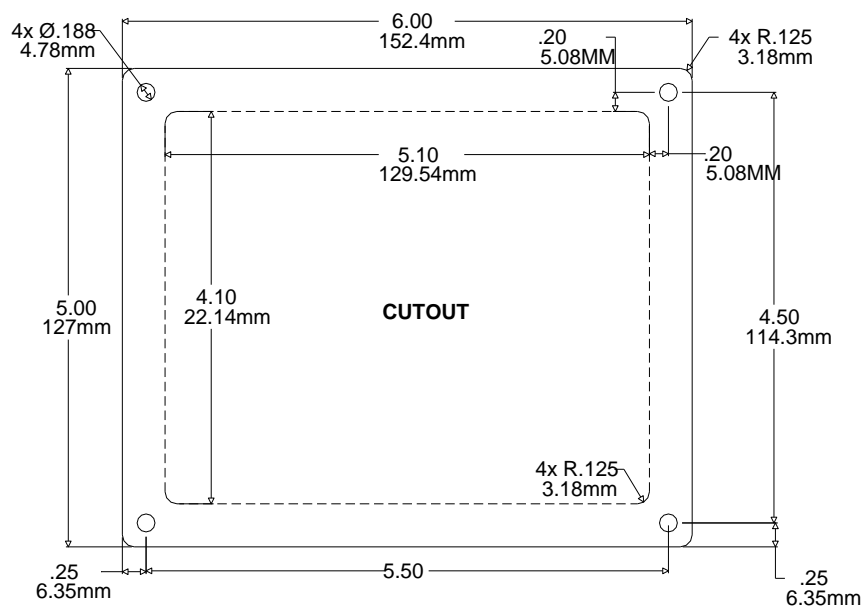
M3460-R11 Chassis Dimensional OutlineMOUNTING FOOTPRINT
